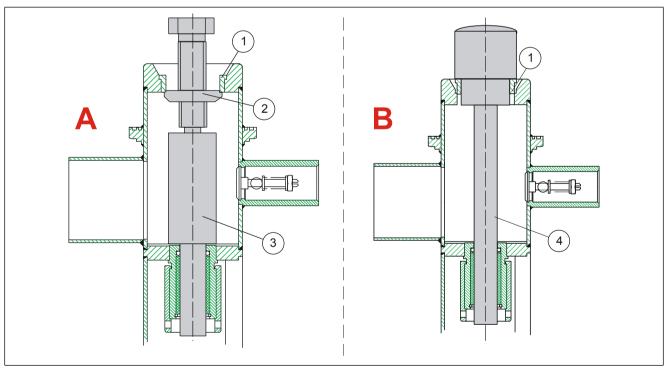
Removing (A) and installing (B) the seat ring: 1 - seat ring, 2 - extracting tool, 3 - support tool, 4 - installation tool.
